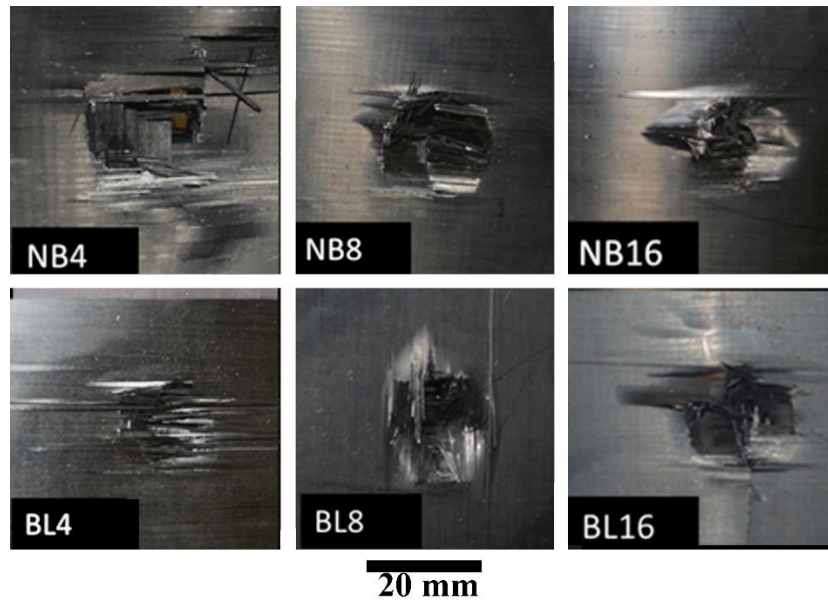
Fracture surfaces of the composite plates prepared with resin B
